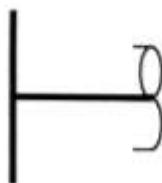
Single-line socket-weld drawing symbol.
